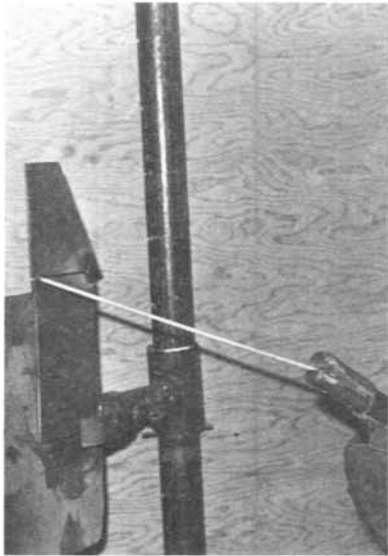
Horizontal weld is done with 5- to 10-degree electrode side-angle, 20-degree incline angle. (Note handy spring-loaded clip that holds pieces to be welded. Clip is on a swiveling work surface that adjusts for height.)
